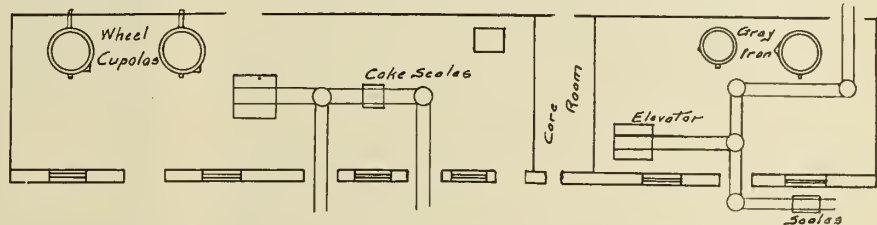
Ground Floor Plan of Cupola Department, Canada Car Co.
